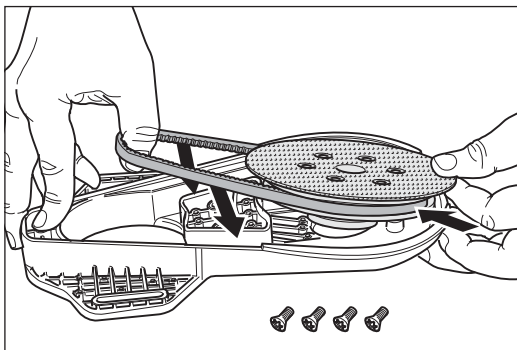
Insert the complete sanding plate with the V-belt into the attachment. Make sure that holes of the complete sanding plate are aligned with the holes in the attachment!
